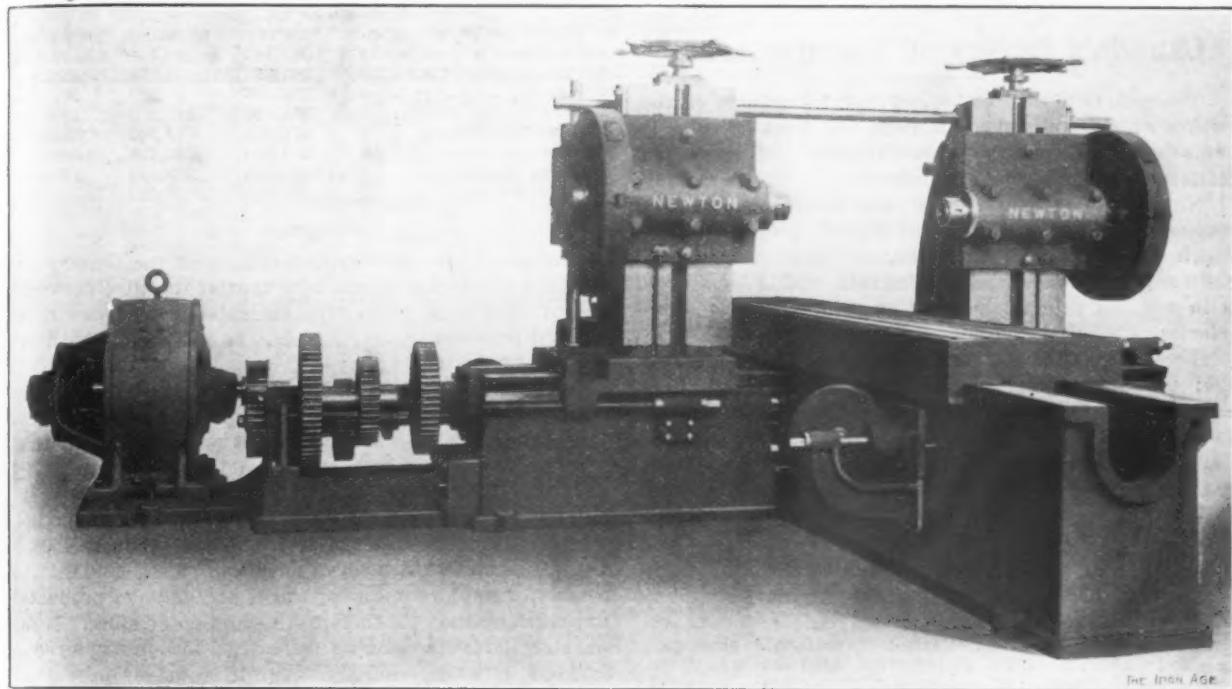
View of the Driving Side, Showing Extended Base for the Motor and Change Gearing.
